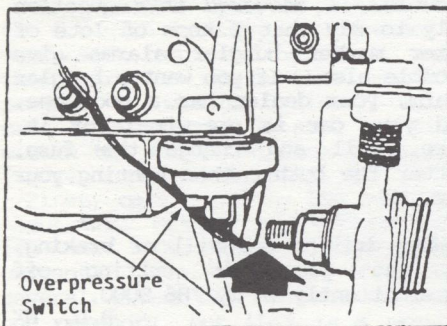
Possible interference between overpressure switch and axle for pedal assembly.
